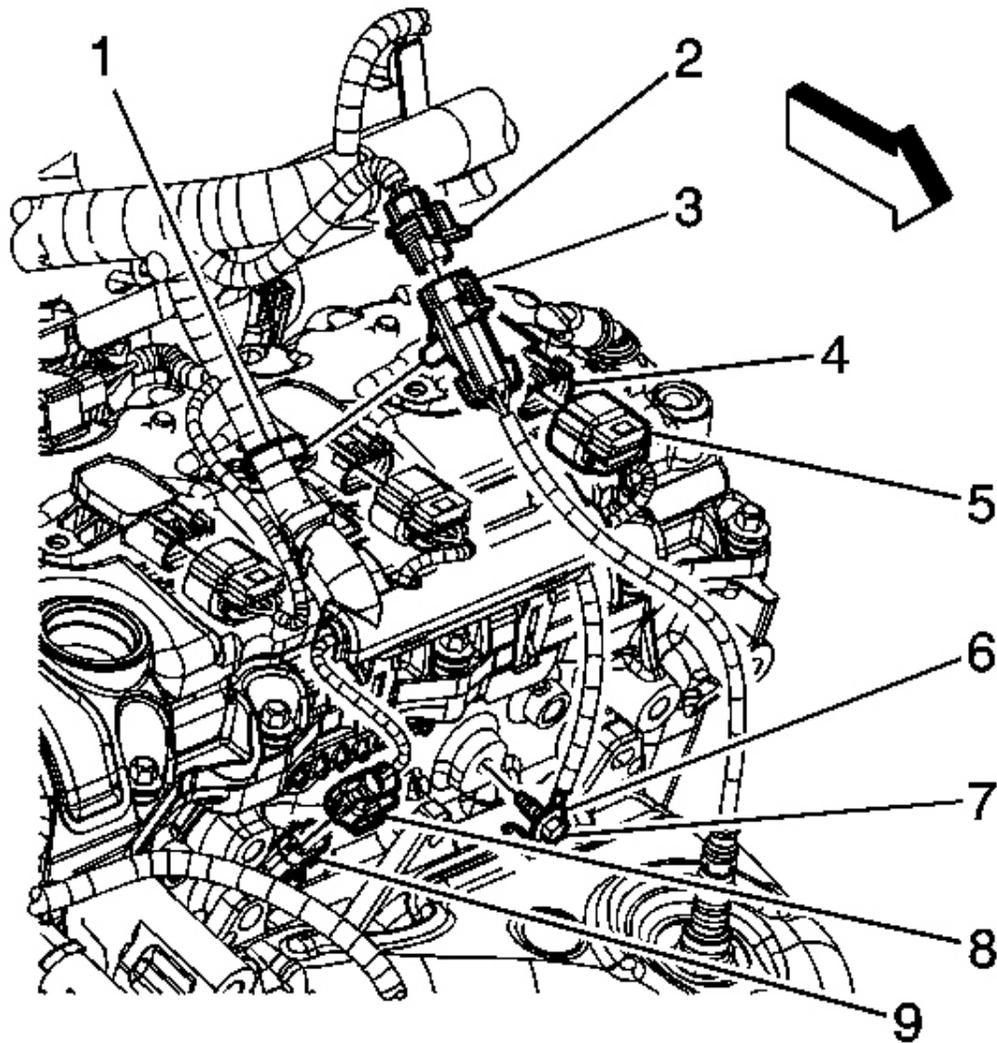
Identifying Engine Wiring Harness Electrical Connector
